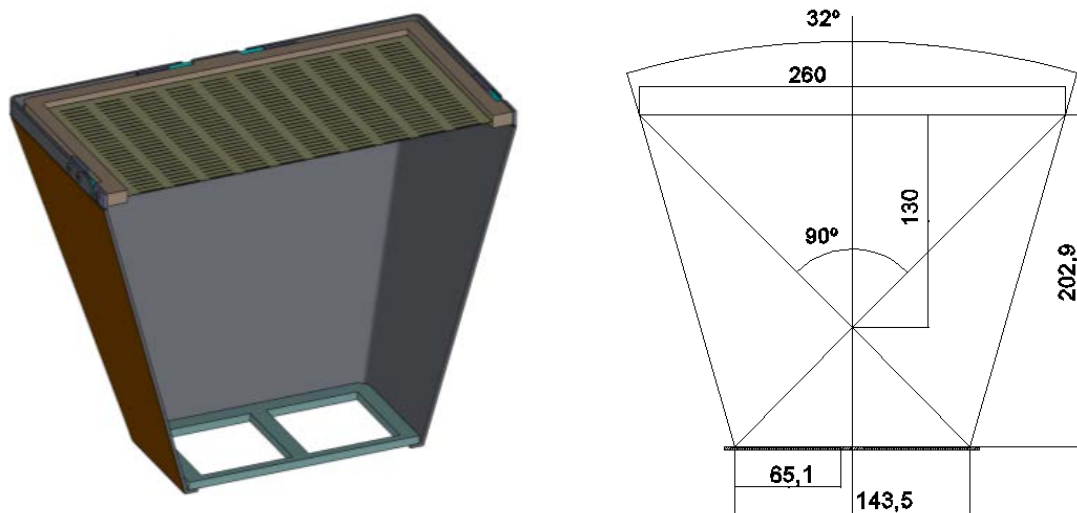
View of “half” of one camera and the “other-side” view of the WFM
